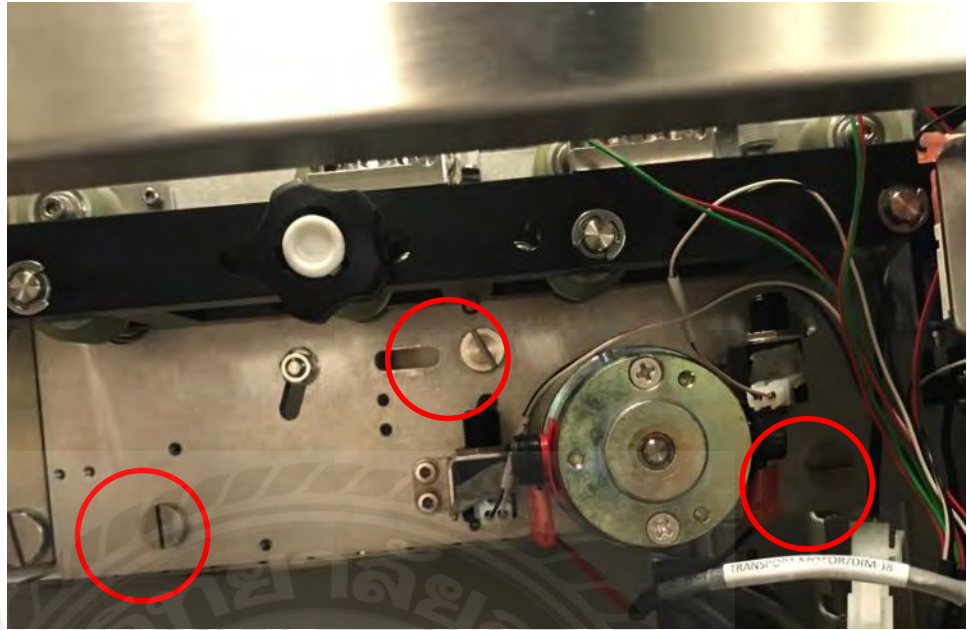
Location of Thumb Screw on the Thin Card Transport Module
